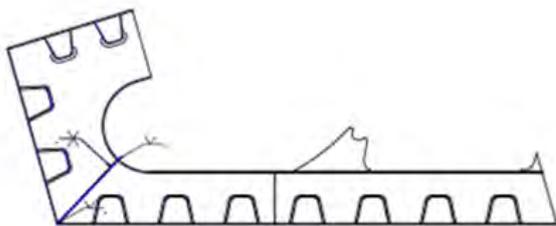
Assembly of web panel to the two inclined bottom panels
